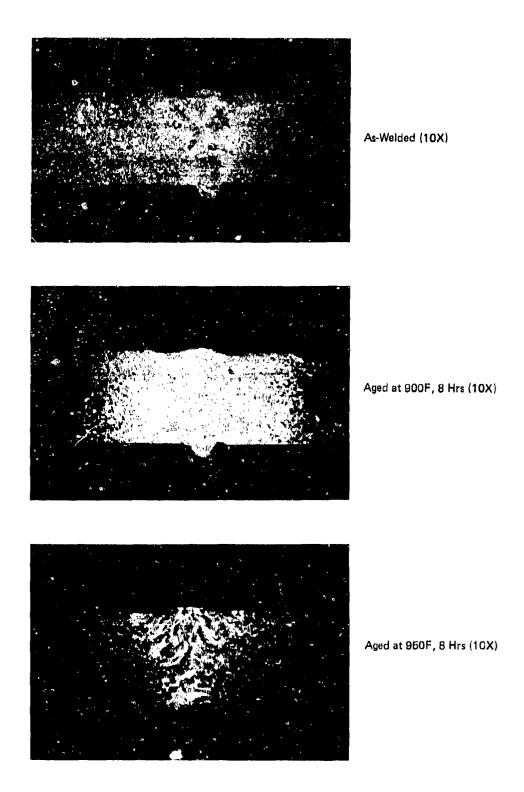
Macrostructures of Electron Beam Welds in 0.100 in. Solution Annealed Ti-15V-3Cr-3Al-3Sn Sheet
